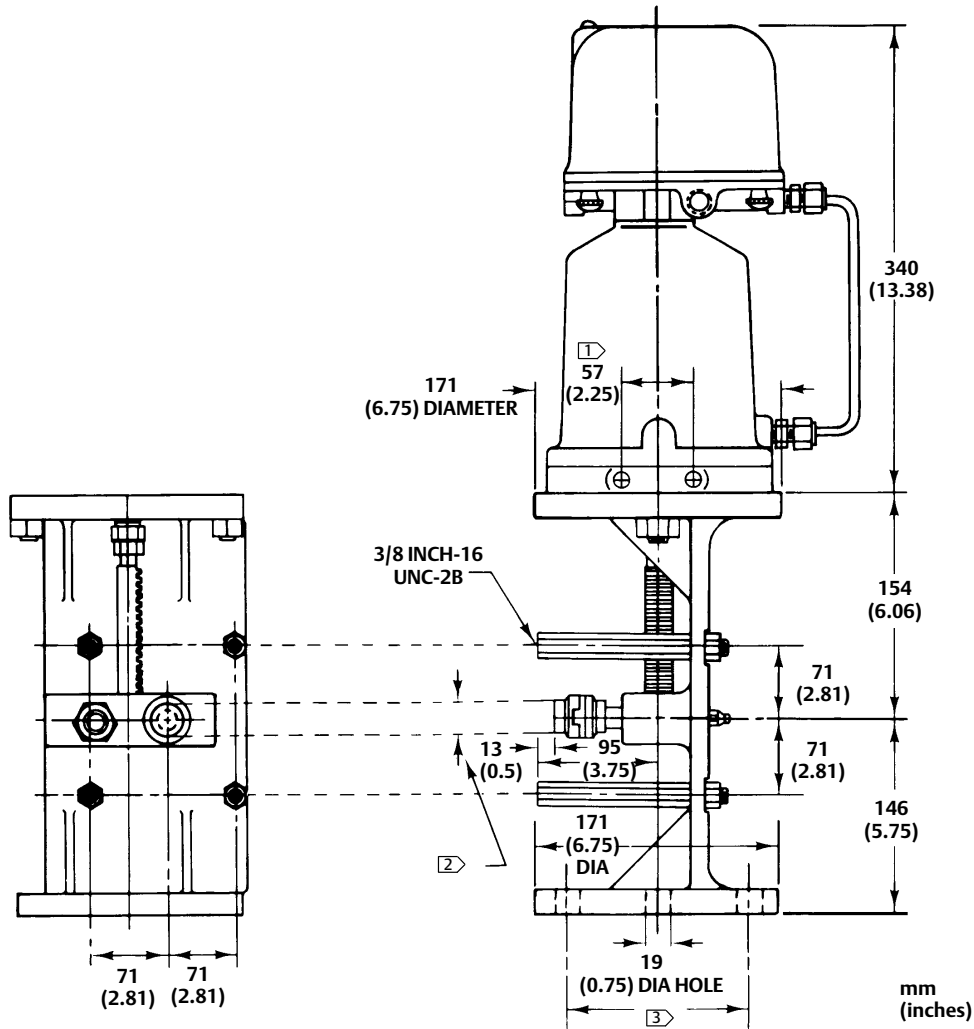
Dimensions for Actuators without Positioner, with Long Stroke, or with Threaded Piston Rod and Universal Mounting Flange (refer to table 5)
